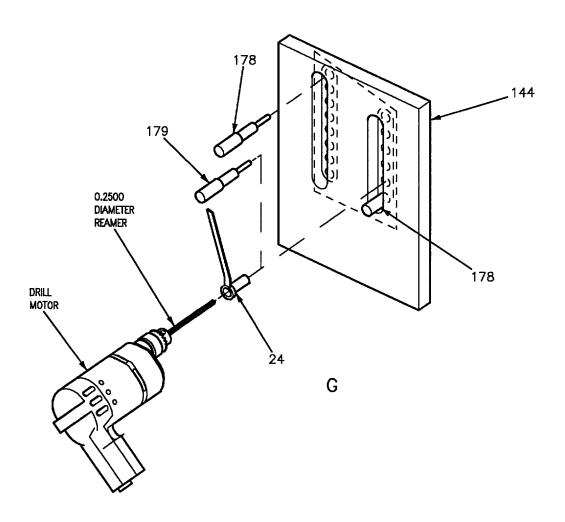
Drilling Holes in Replacement 74A110964 Support Assembly (Sheet 4)
